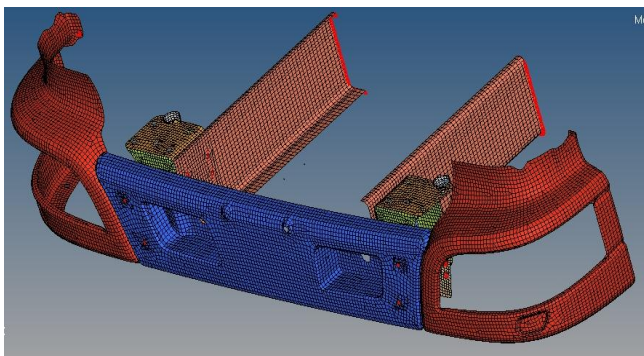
meshed model of bumper system assembly (front view)
